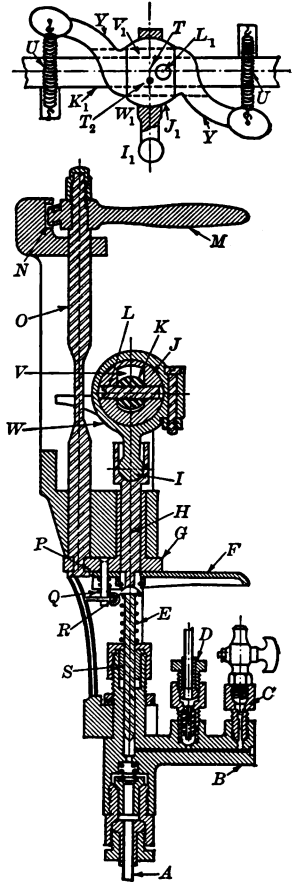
SPEED REGULATOR, MEITZ & WEISS OIL ENGINE
